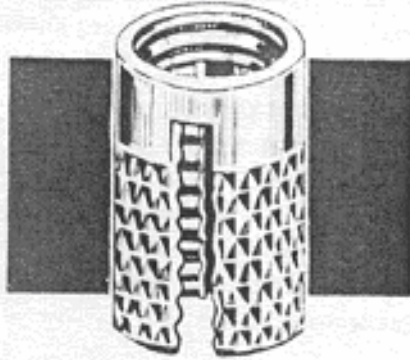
Diamond knurled insert is designed to be pressed into molded parts after molding. (Courtesy Boots Aircraft Nut Div., Norwalk, Conn.)
